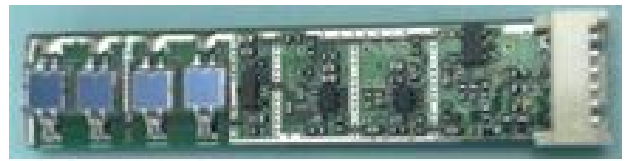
PCB Image of PIN-Diode Sensor Module.
